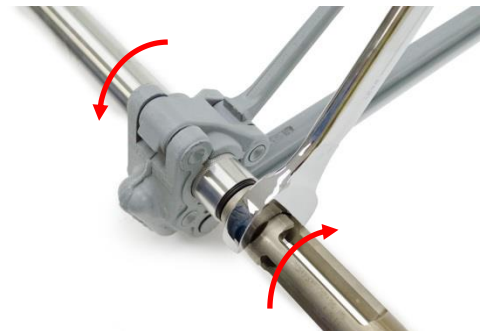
Steps for installing the housing on the memory module (1.56" OD)
